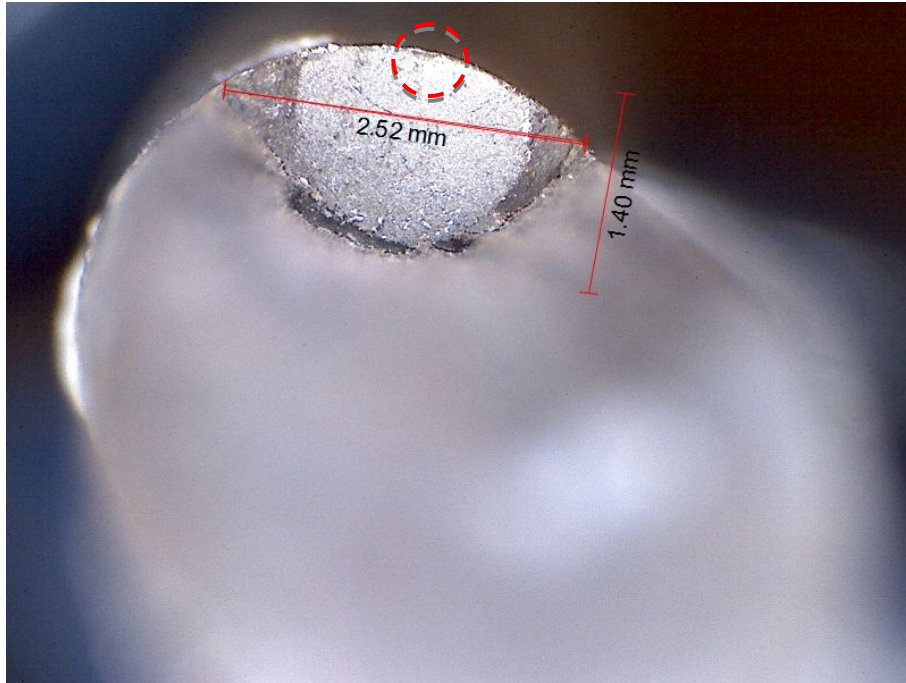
Fatigue fracture plane of the wire shown in Figure 5-7 & Figure 5-8
